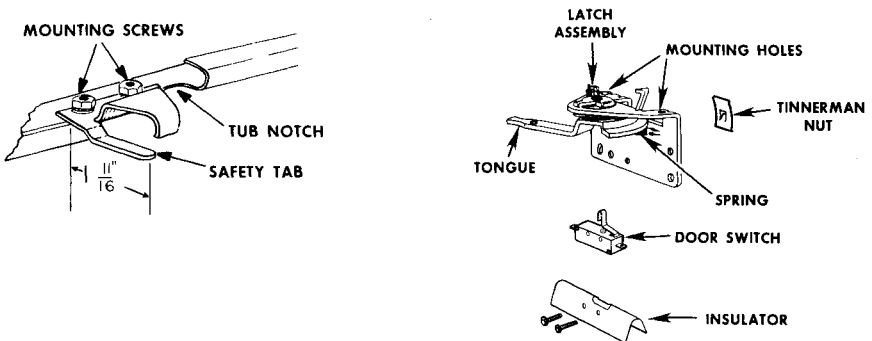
Typical Latch & Switch Assembly used on Hotpoint models
